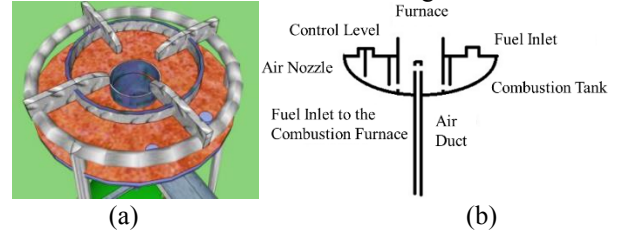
Combustion Furnace Design (a) 3-Dimensional (b) 2-Dimensional
